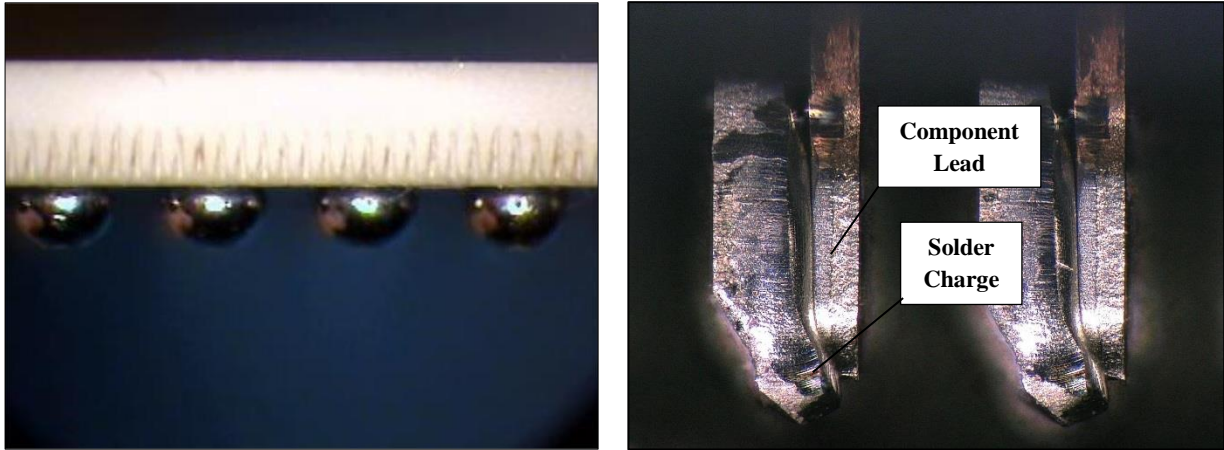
Solder Balls on BGA's v. Solder Charges on SEARAY™ SEAF8-RA
